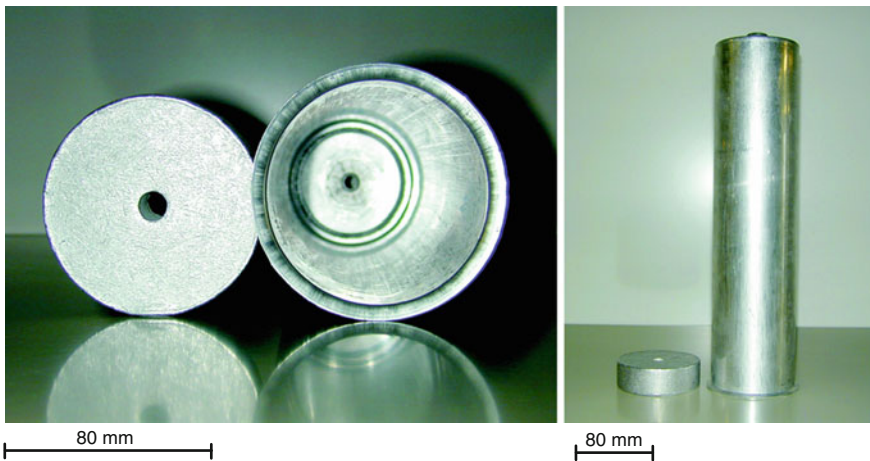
Manufacturing examples of cup backward extrusion of aluminium (Source Schneider-Clauss GmbH)
